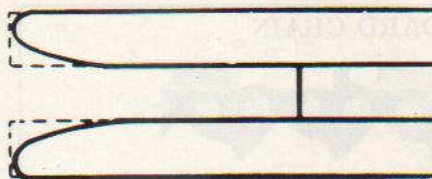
Worn inside of rails can be caused by inconsistent face angles, excessive face angles or excessive joint.
